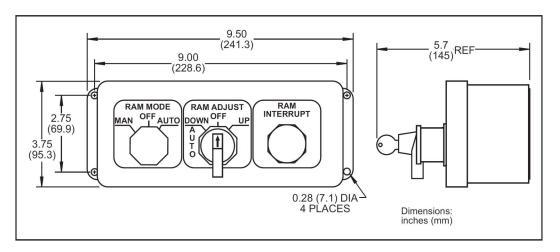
Operator Control Enclosure: Mounting Dimensions
